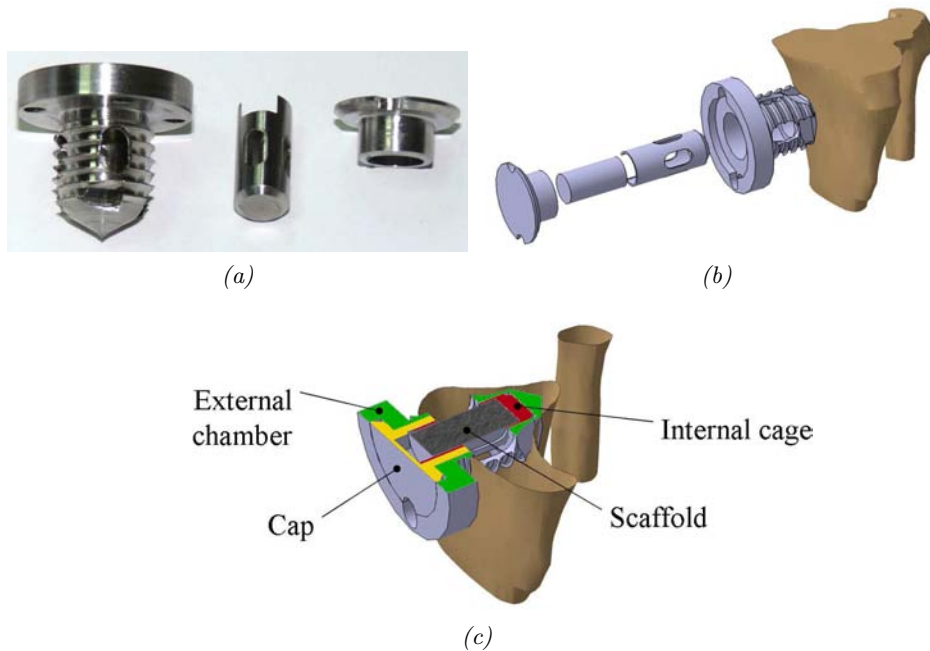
Assembly of components for the insertion of scaffolds without compressive stimulus. (a) The fabricated components, (b) explosion and (c) cross-sectional view of the assembly.
